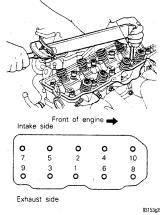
Cylinder head bolt tightening sequence—2.0L SOHC engine
